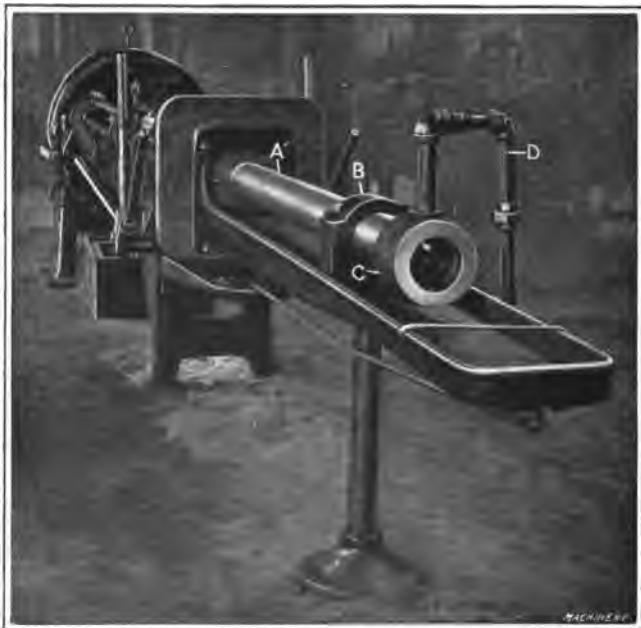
Broaching Fixture with Provision for delivering Coolant to the Work under High Pressure
